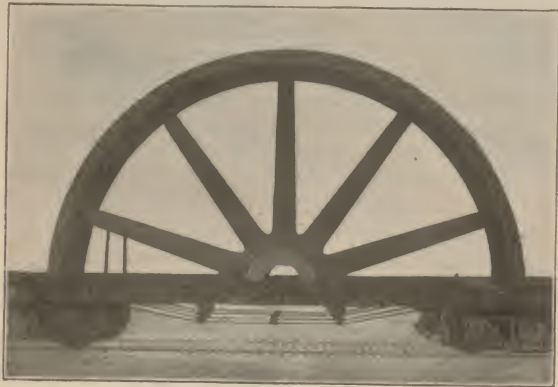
WHEEL LOADED FOR SHIPMENT.
